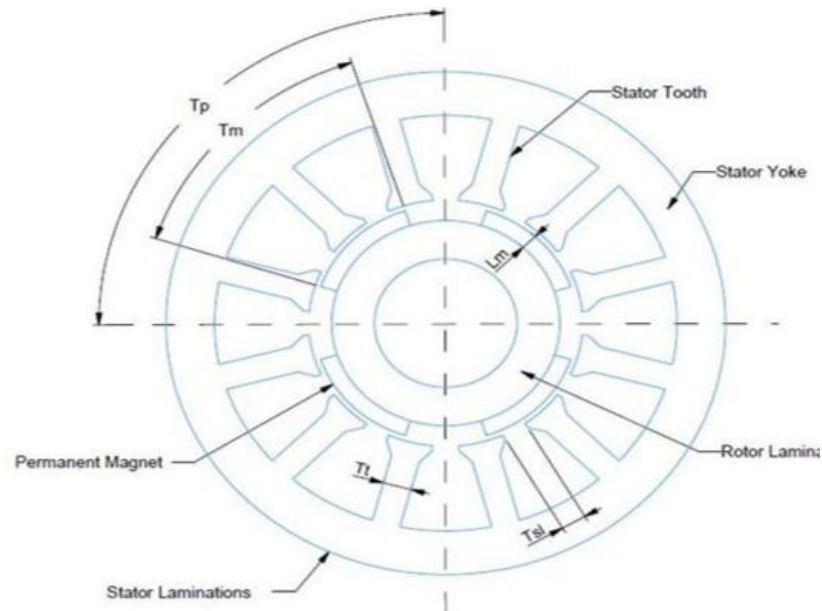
Cross-sectional view that shows the main dimensions for SPM motor
